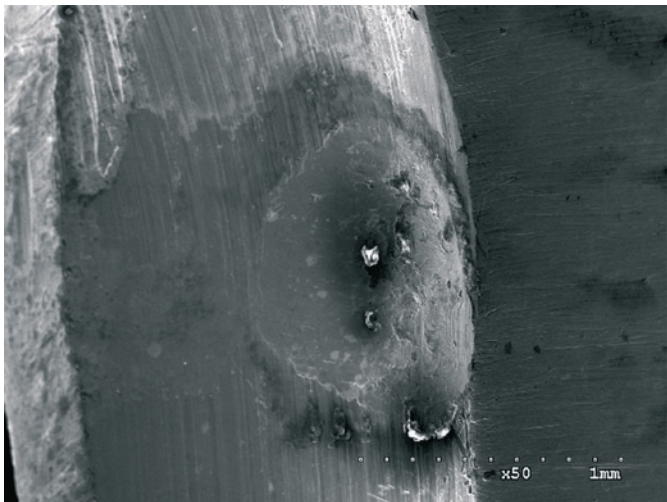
Corrosion damage on the surface of the reconstruction plate
